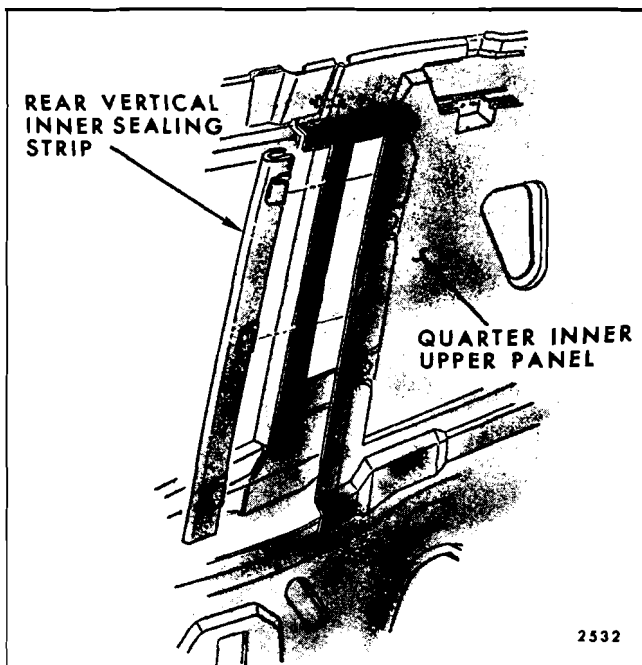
Rear Quarter Window Rear Vertical Inner Sealing Strip Assembly
